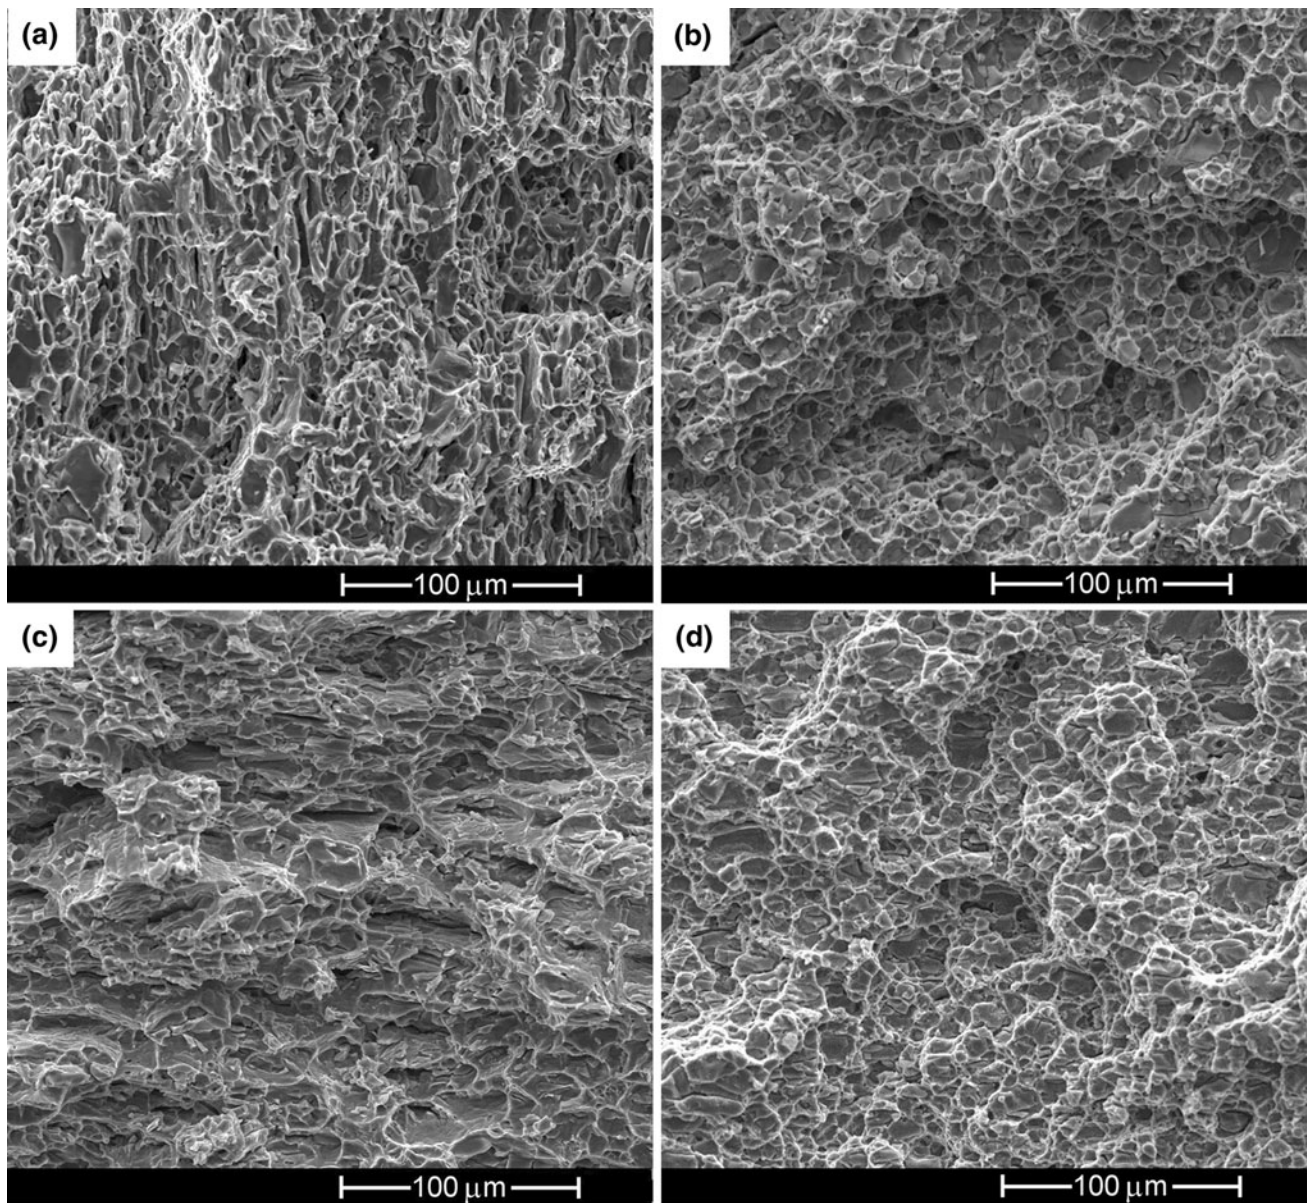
Fracture surfaces: (a) consumable rod, tensile; (b) friction deposit, tensile; (c) consumable rod, impact; and (d) friction deposit, impact. Note finer and more equiaxed dimples in friction deposits
